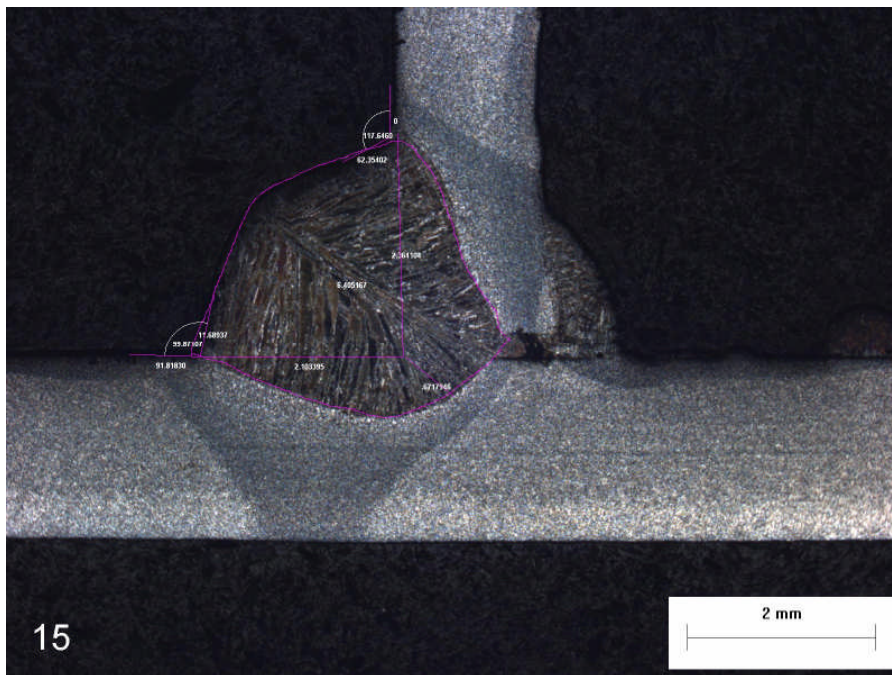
Macrosection for a Dual-Spot CO₂ LBW/GMAW-P Hybrid Weld Made at 1.75 m/min on 2-mm Sheet
